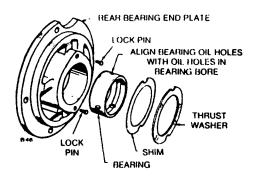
BEARINGS FOR REAR BEARING PLATE
